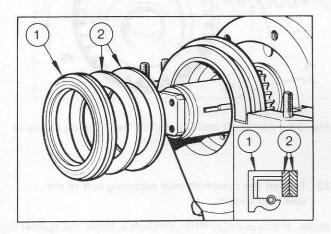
Assembling Crankshaft Pulley Oil Seal Into Timing Gear Housing Cover
